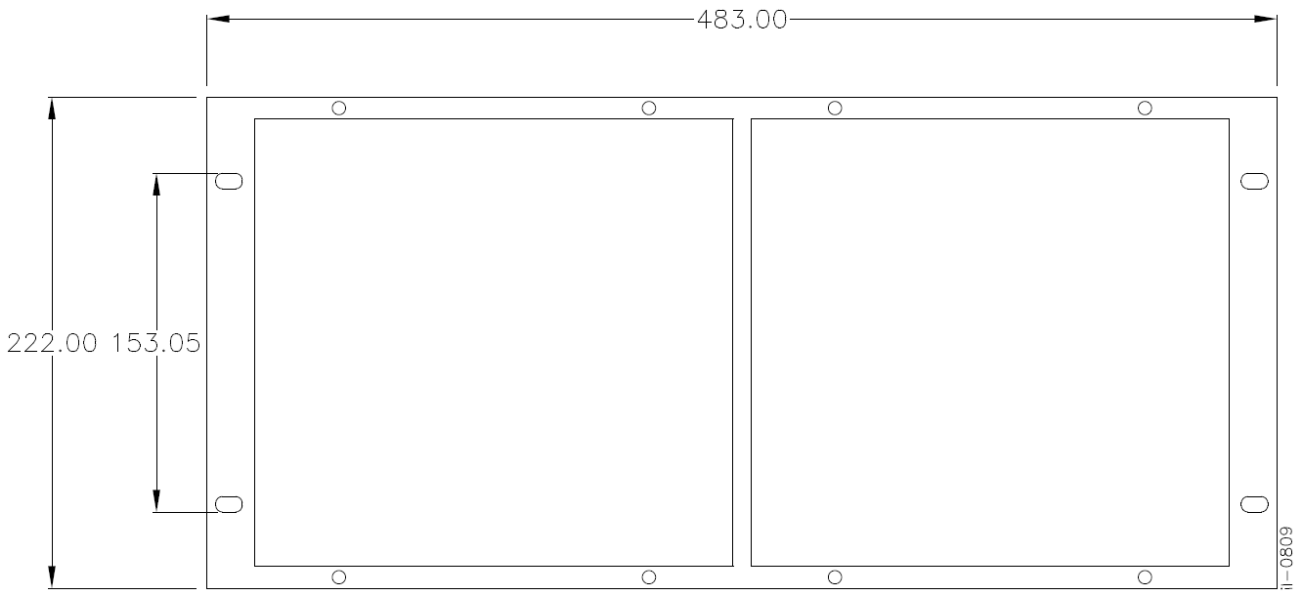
Mounting panel to install two remote acquisition modules (RA331/332) in a 19-inch rack
